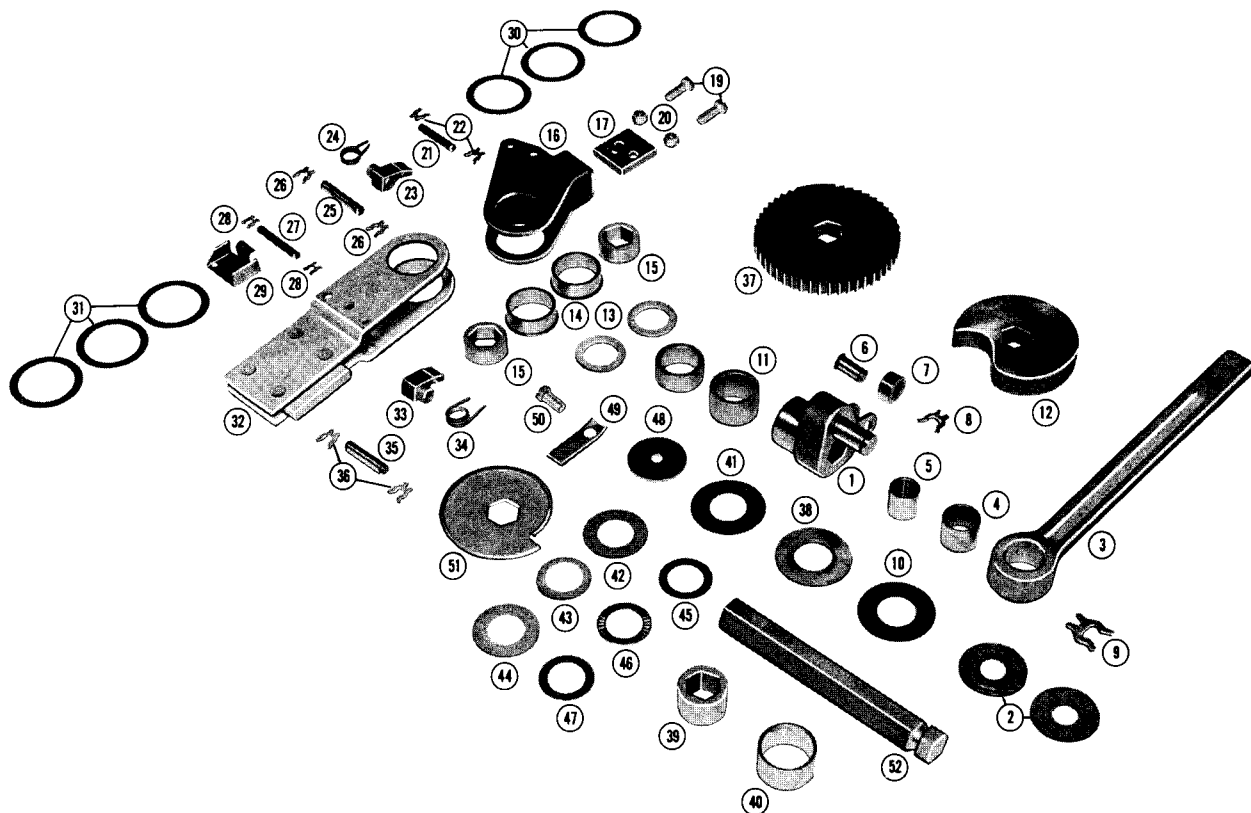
Stored Energy Mechanism: Crank Shaft Sub-Assembly
